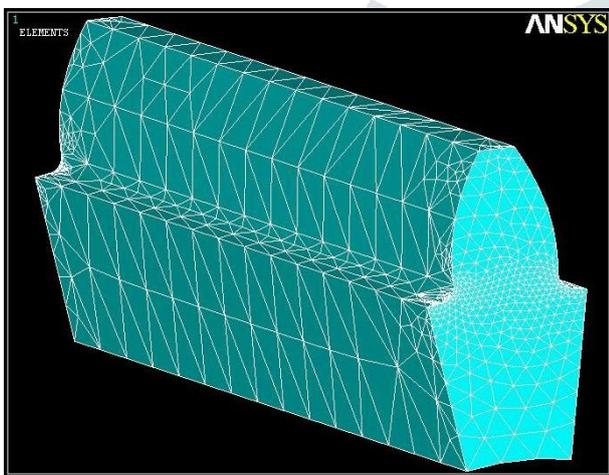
Meshing of circular fillet tooth sun gear in ANSYS
